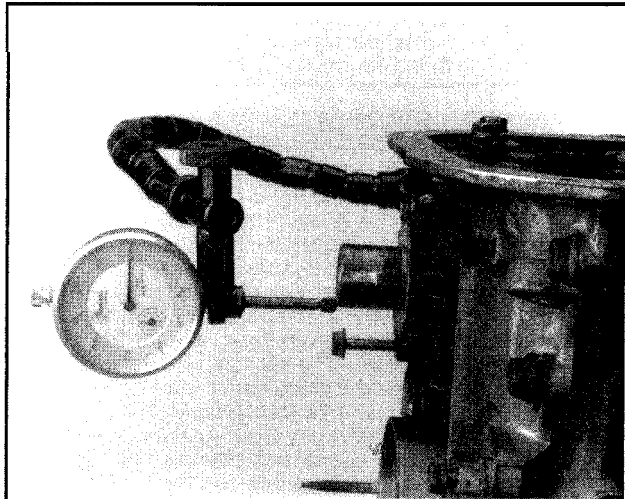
This dial indicator is measuring the end-play of a crankshaft during a powerhead rebuild
